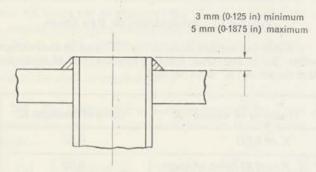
Detail of Seal-Weld for Plain Tube
